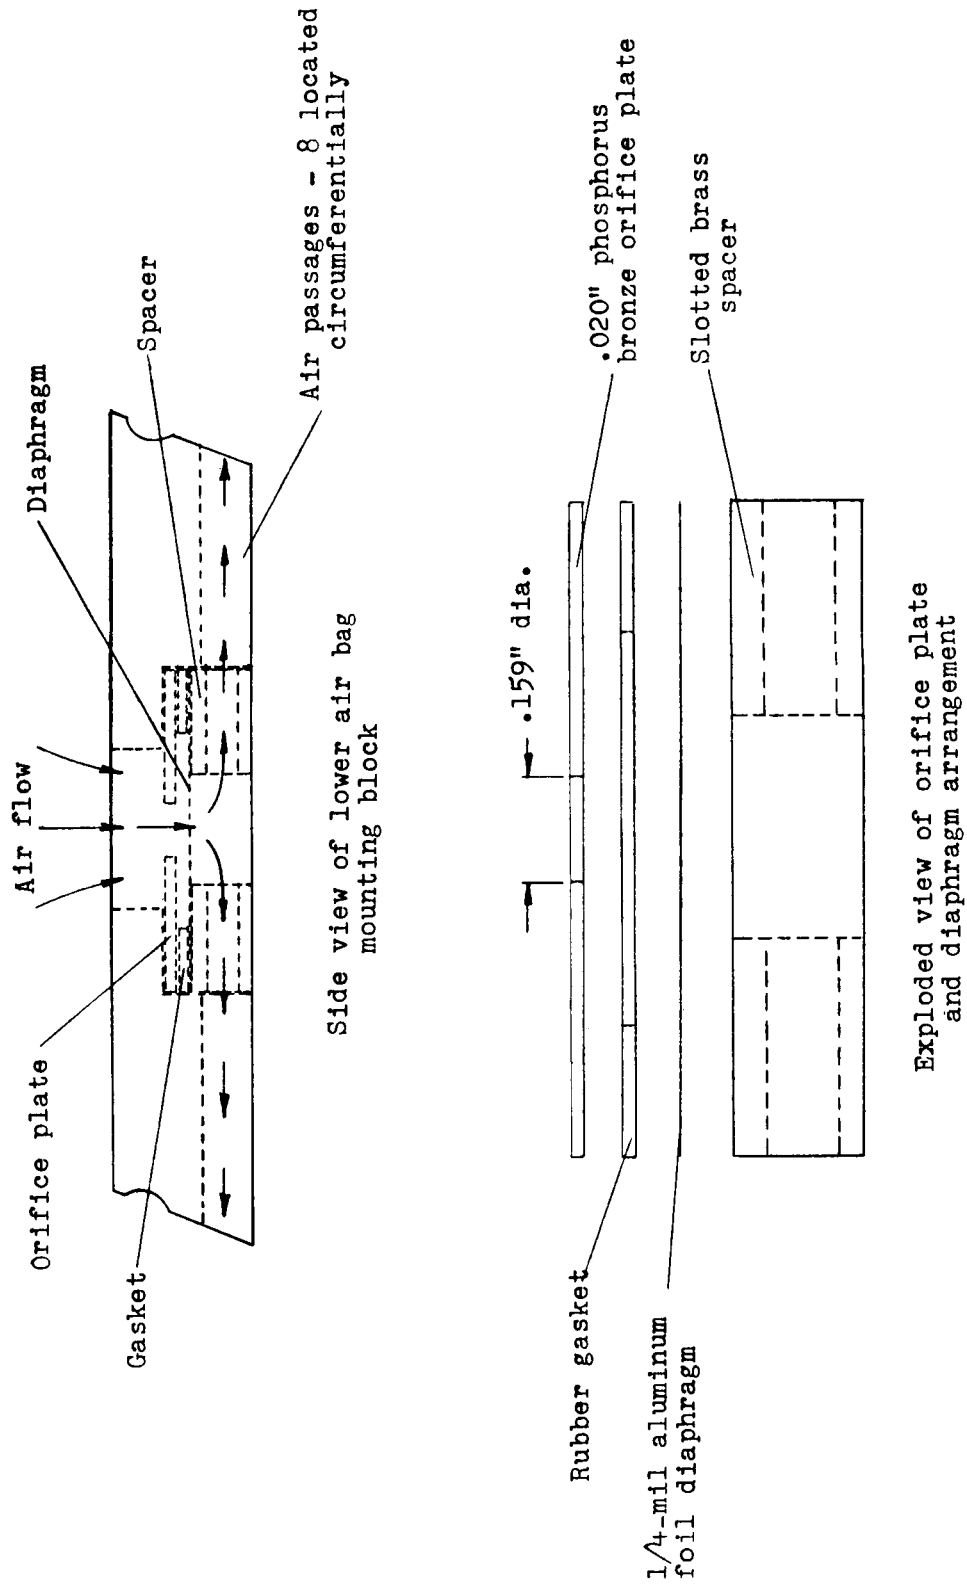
Sketch showing details of lower air-bag mounting block. (All dimensions are in inches model scale.)
